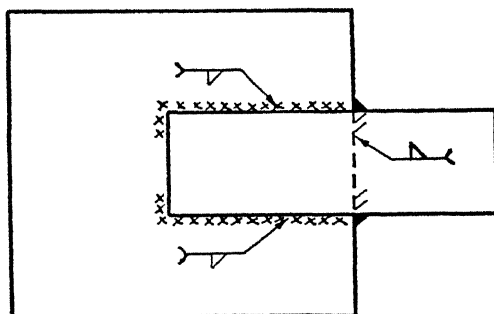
Example of welds hooked around the corners to obtain resistance to tearing action on welds when subjected to eccentric loads.
